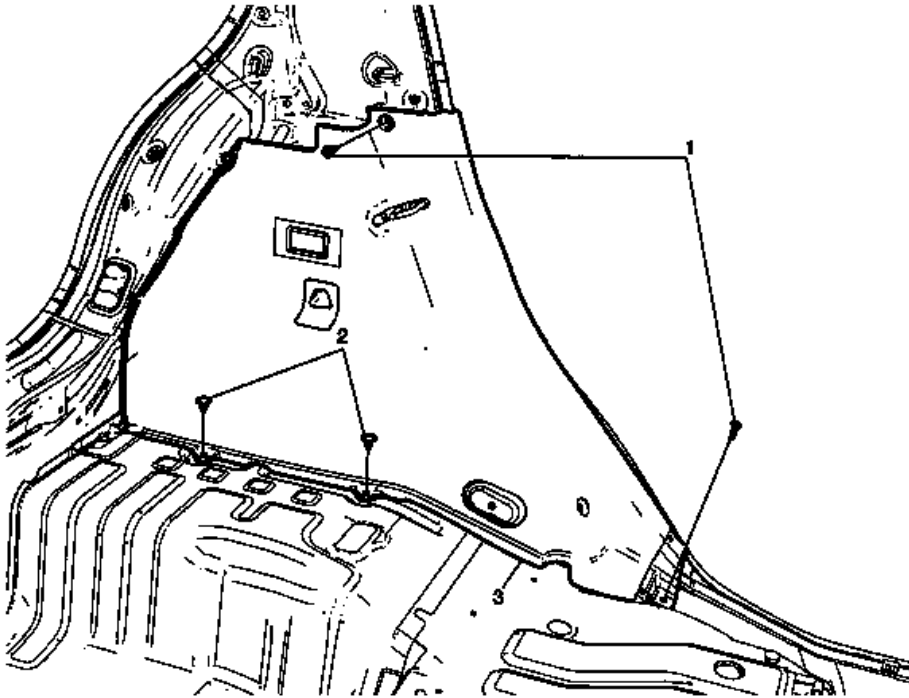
Rear Wheelhouse Trim Finish Panel Assembly
